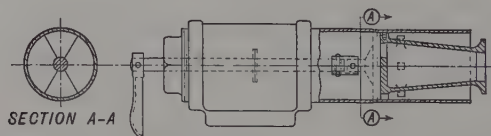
Nozzle for raw producer gas burner, with valve for regulating induction of gas.
